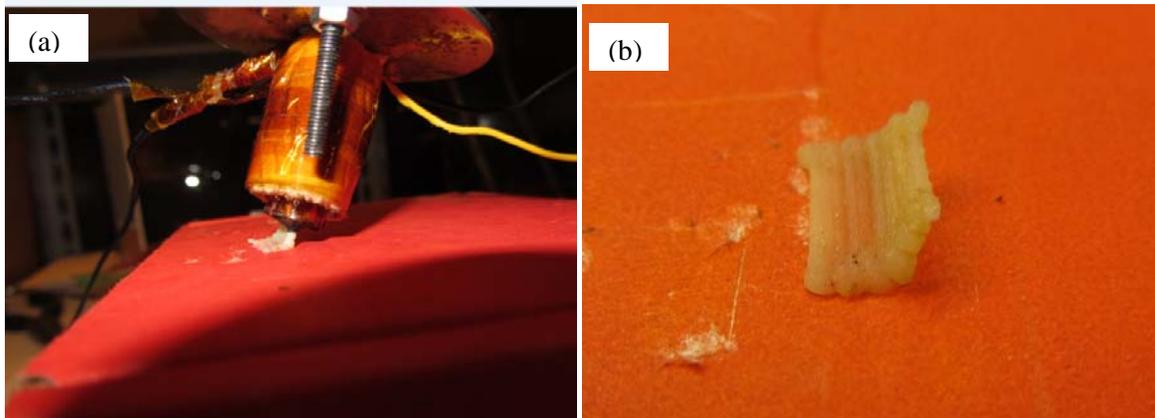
Test results. (a) Part fabrication by FDM extrusion in a tilted angle; (b) built part.
